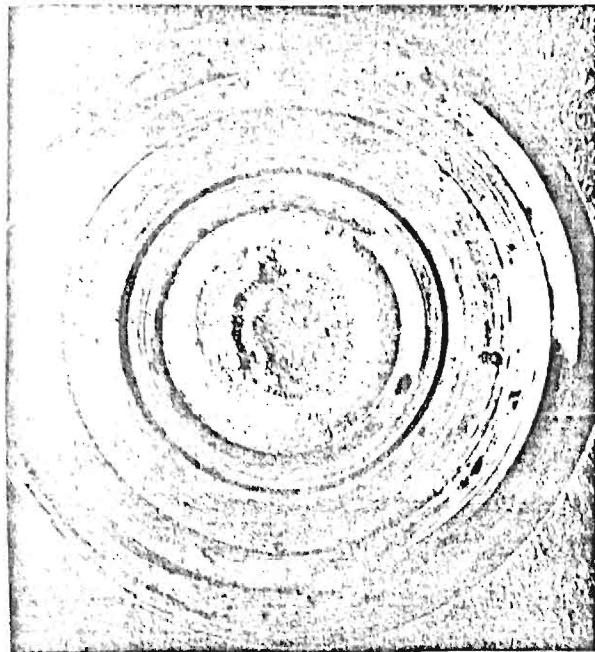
B — Surface of a rotating bending fatigue fracture in a medium carbon steel shaft with a hardness of HB 143. The part had a large gentle radius in the fillet, but sharp tool marks caused many origins around the periphery, with the fracture dished in toward the large diameter. Final rupture was near the center, indicating that the stress was well distributed.
